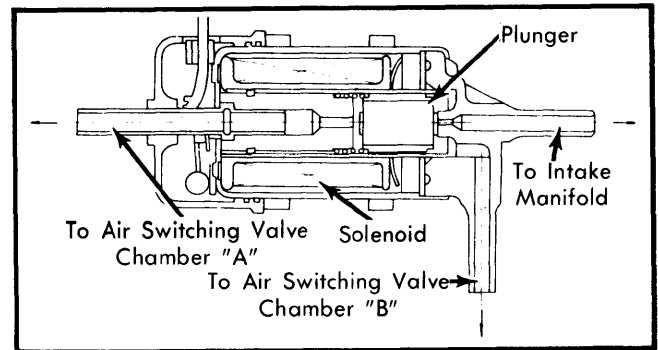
Sectional Drawing of Vacuum Switching Valve
